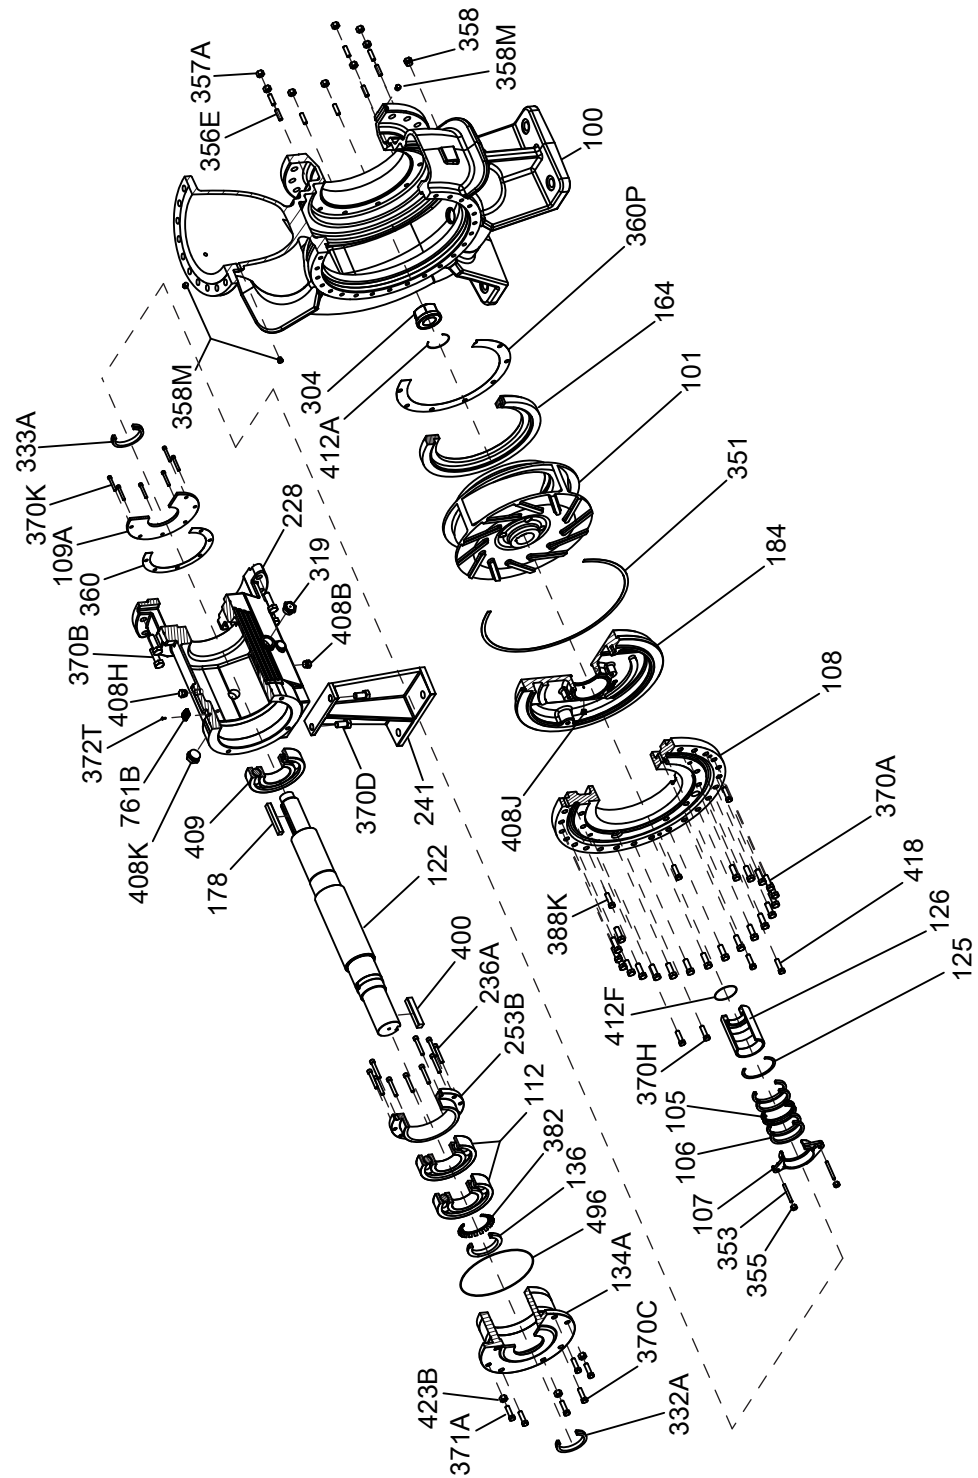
Exploded view of 3180 and 3185 XL1, XL2-S, and XL2 groups
